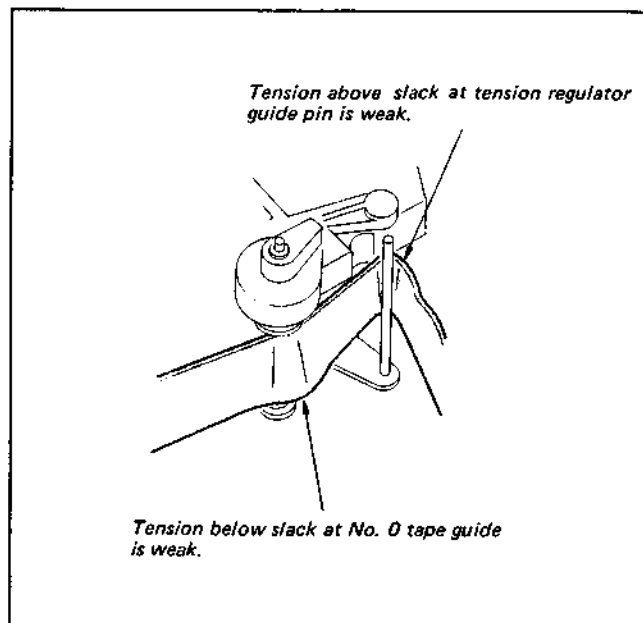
Replacement and adjustment (3) of tension regulator arm plate assembly
